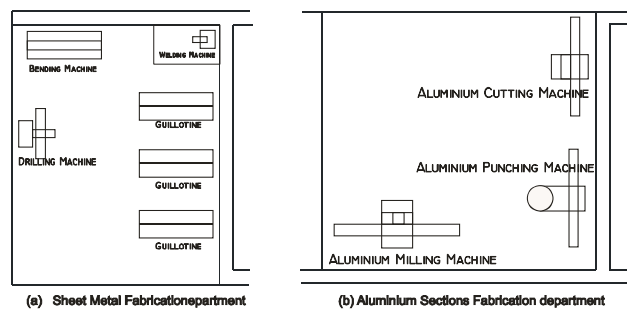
Sheet Metal and Aluminium Sections Fabrication Departments
